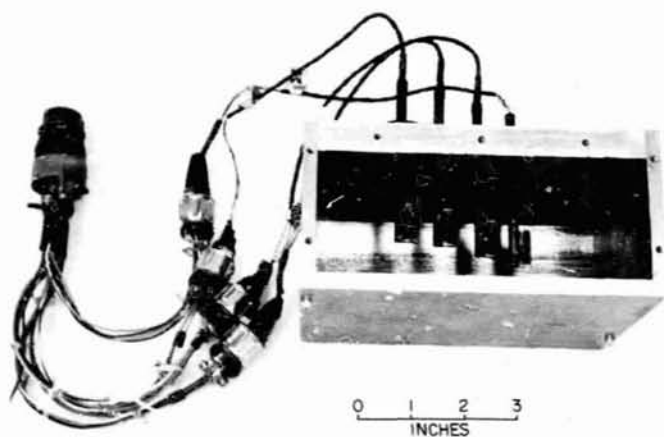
Assembled unit ready for vacuum test after foam blowing (top panel removed, side panel added)
